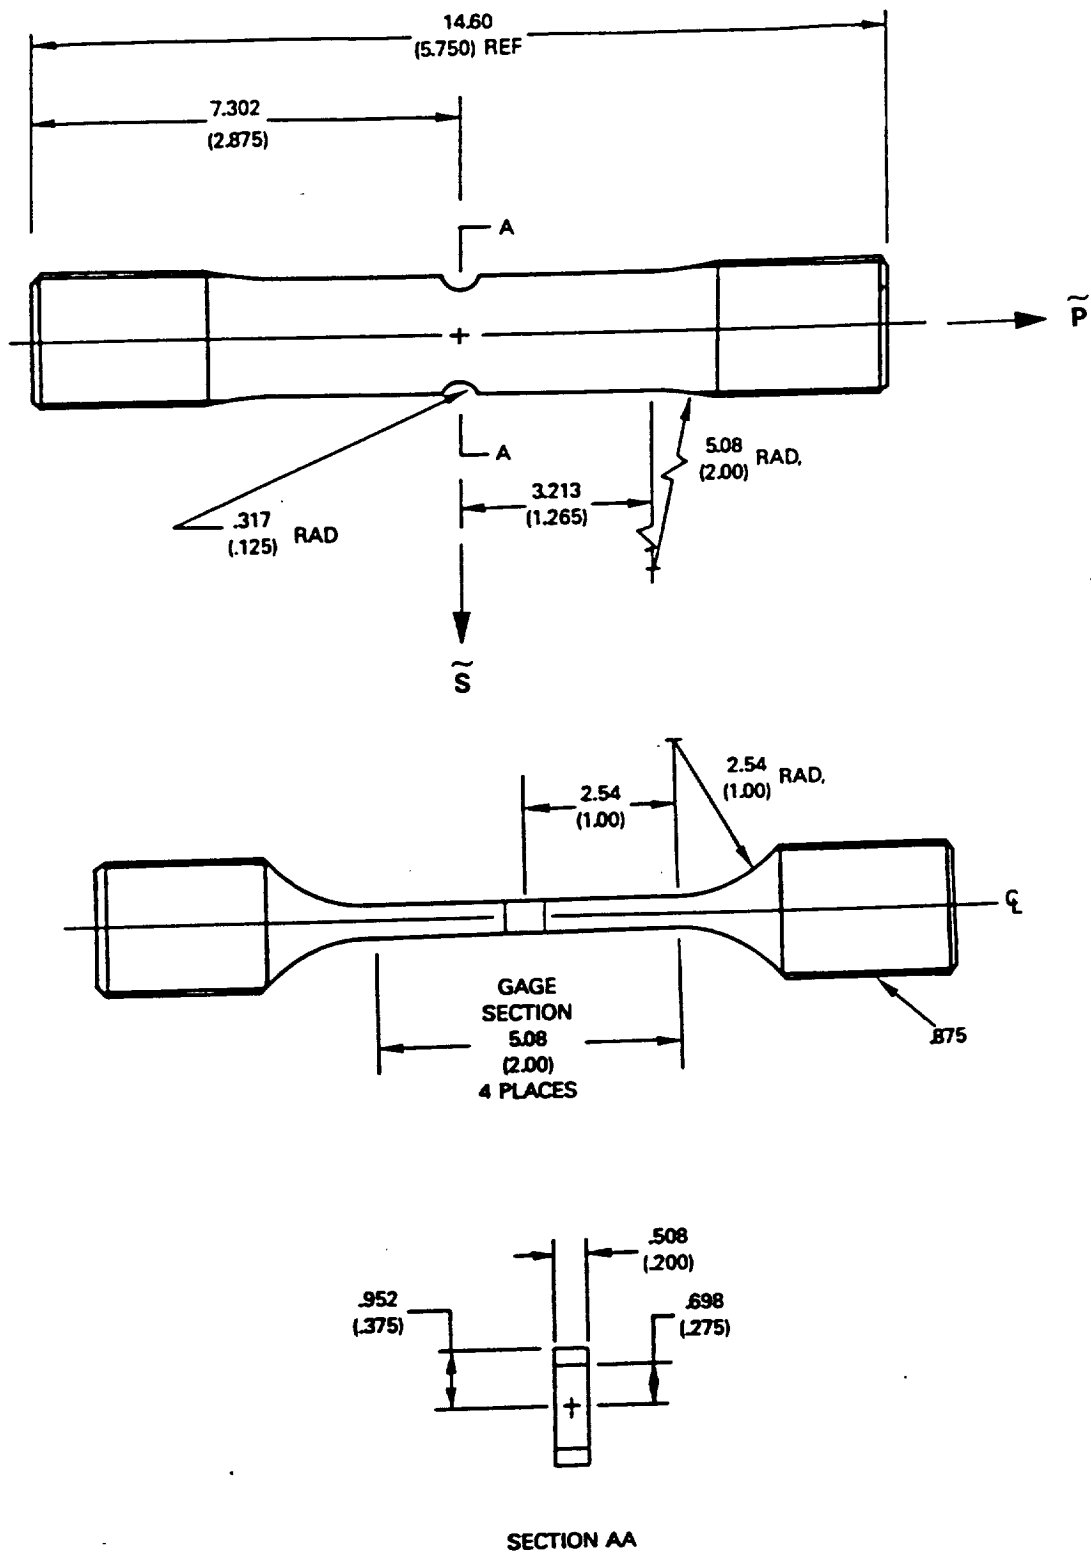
Thick Mild Notched Fatigue Specimen Geometry - cm (in.)
